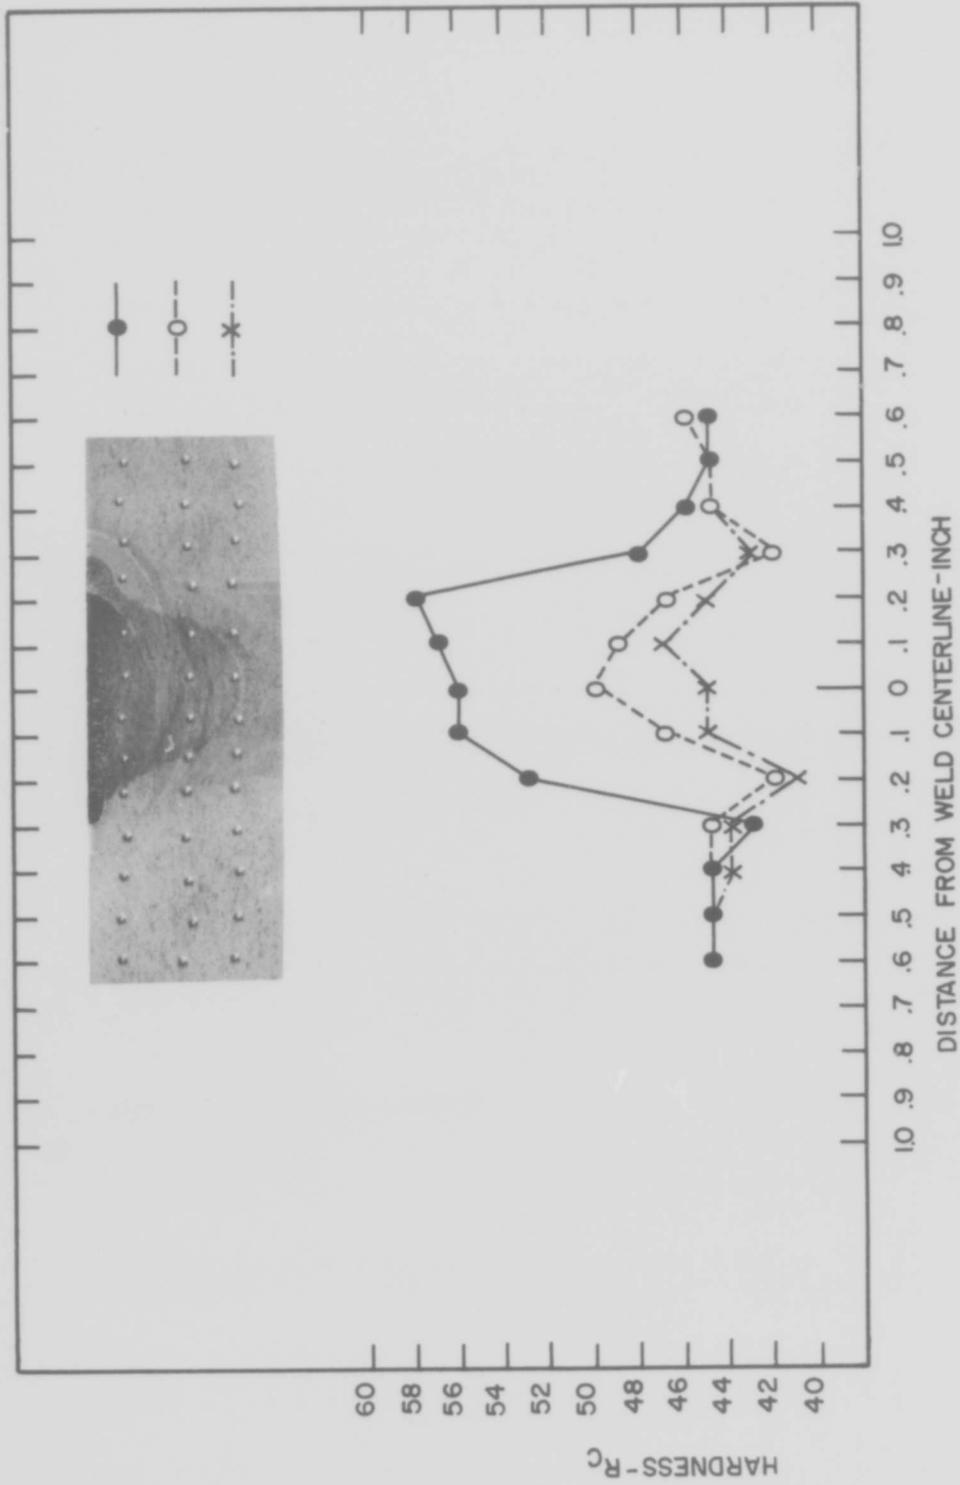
Hardness Survey of TIG Weld No. D227 Made in AMS 6435 Plate Material Tempered at 800°F at a Welding Speed of 10 ipm Using Filler Wire No. 5.
